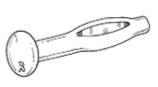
Compression bolts like the Rawl Drive are larger than the drilled hole and are forcibly hammered in, compressing as they go.
